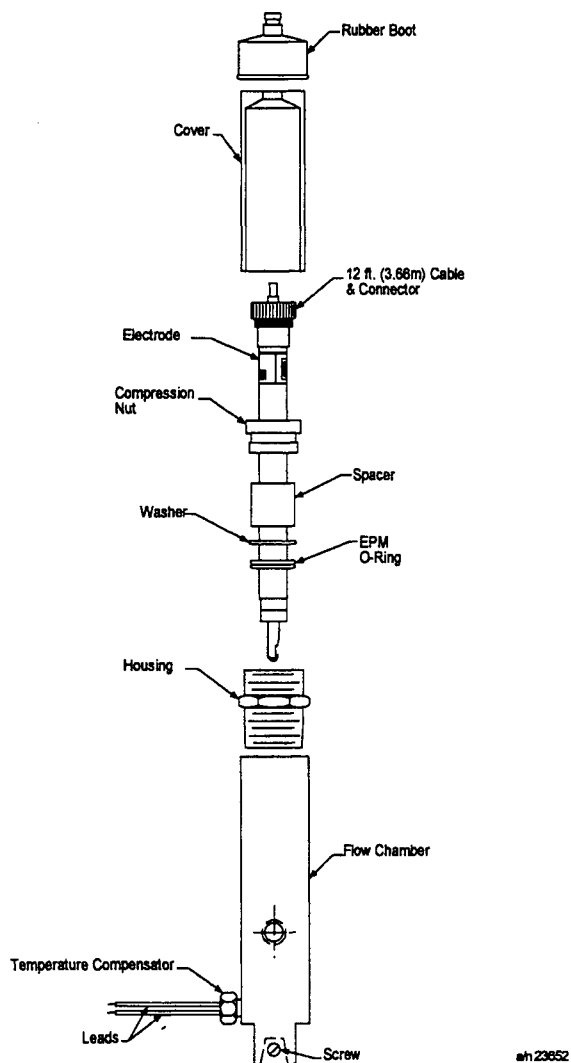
7758-08 Electrode Mounting component parts, High Purity Water Option
